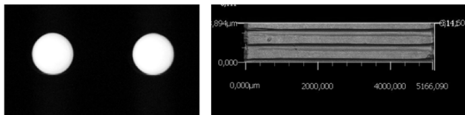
Carbide, t=5 mm; Entry diameter 146µm (left); LSM scan of cross section (right)
